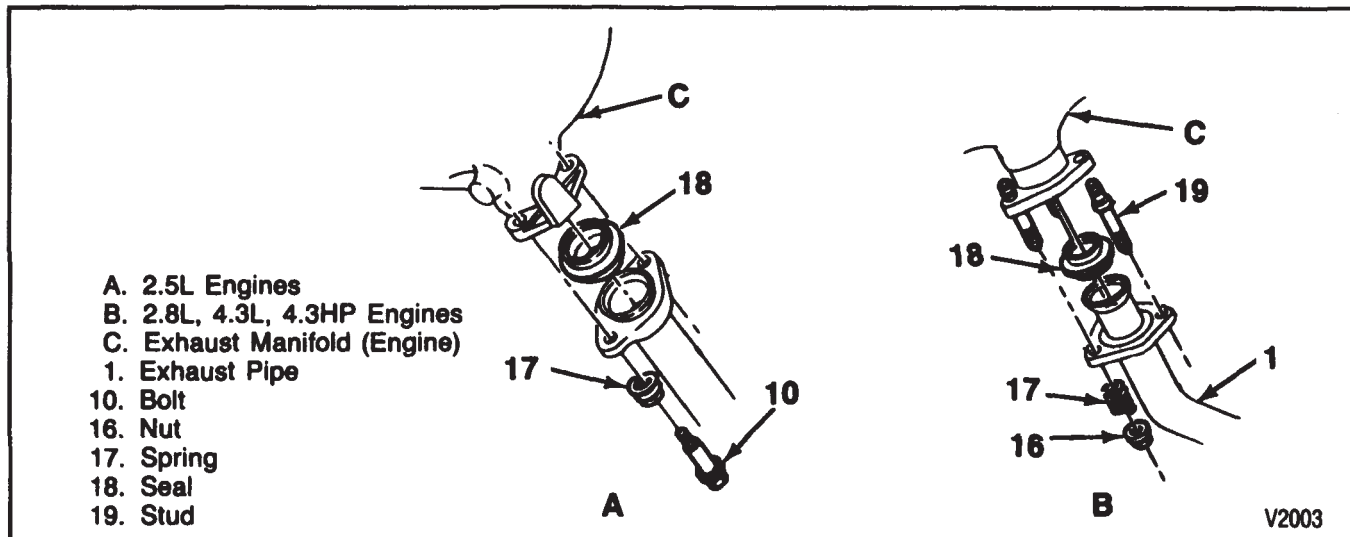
Exhaust Pipe to Engine Connections, All 2WD and 4WD Models
